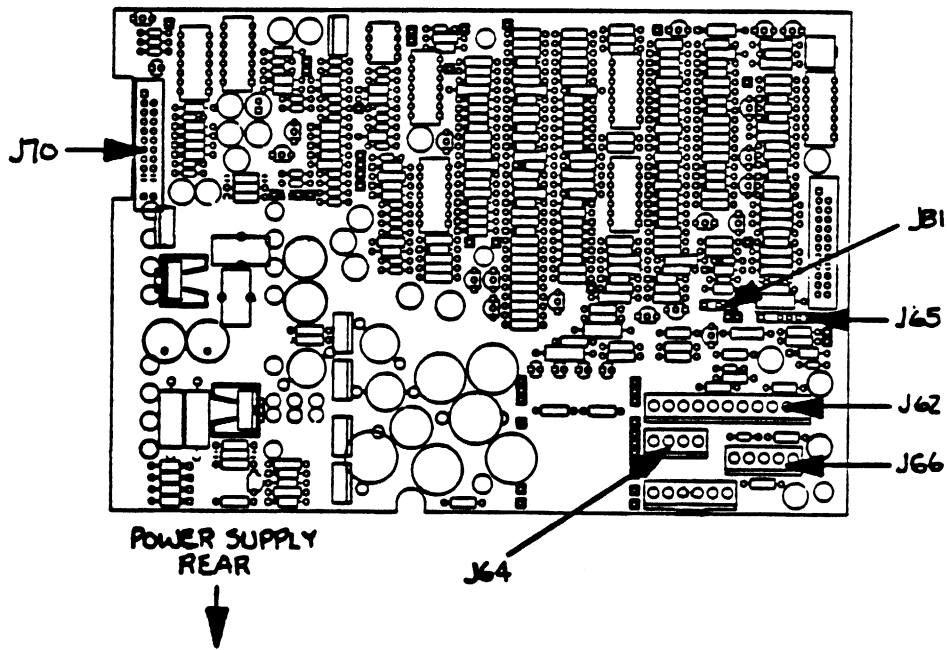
Bottom view of A2A2 Control Rectifier Board showing connector locations.
